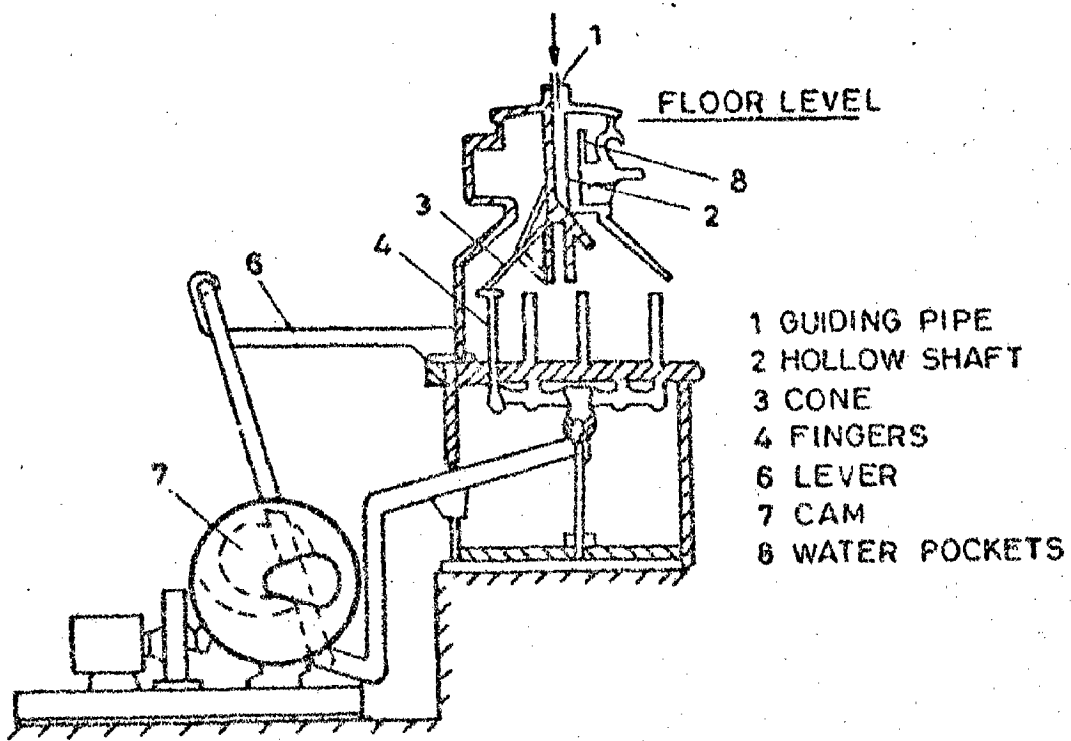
SHOWING MAIN PARTS OF COILER (EDENBORNTYPE)
